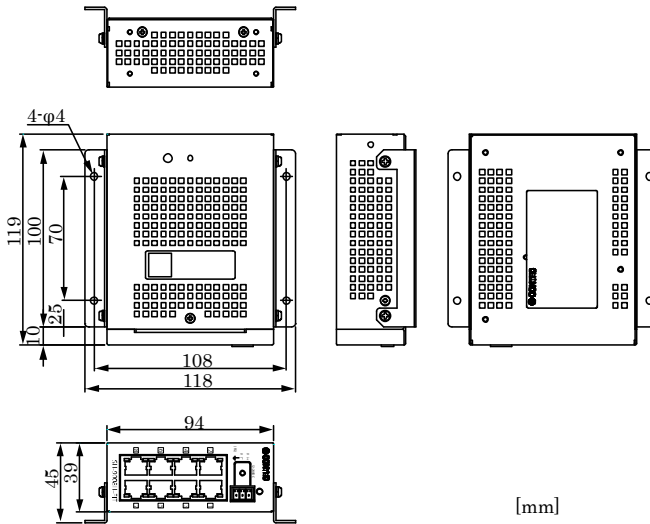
Physical dimensions when flat putting fixing brackets is installed
